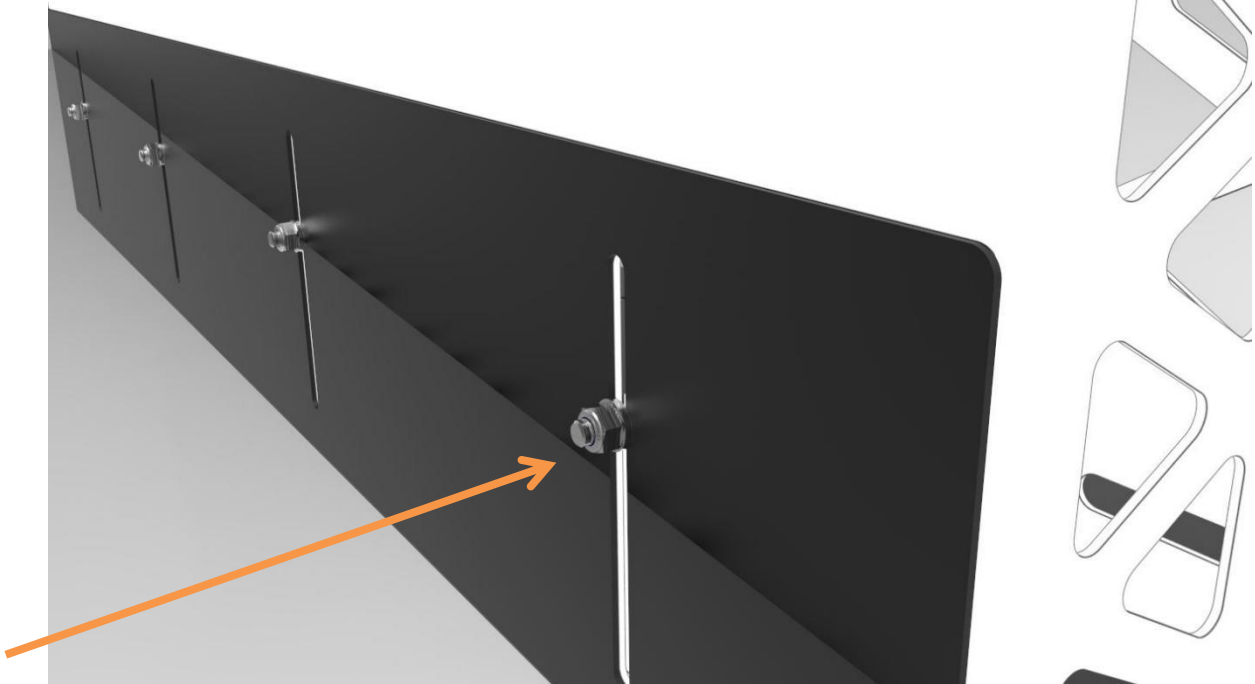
Fasten the Bracket on securely to the Chair Carrier using M6 Nyloc Nuts
